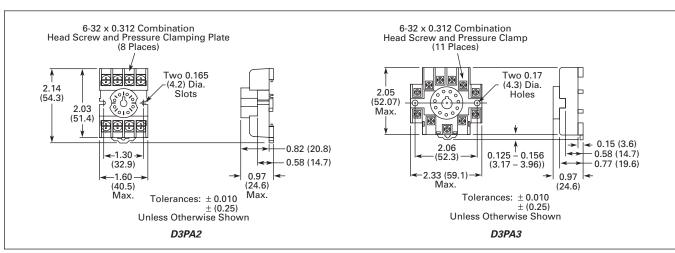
D3PA2 and D3PA3 Sockets — Approximate Dimensions in Inches (mm)
